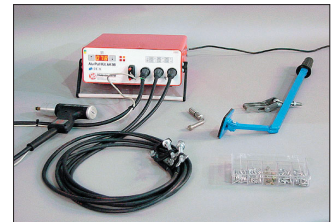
This stud welder is designed specifically for use on aluminum body panels.
